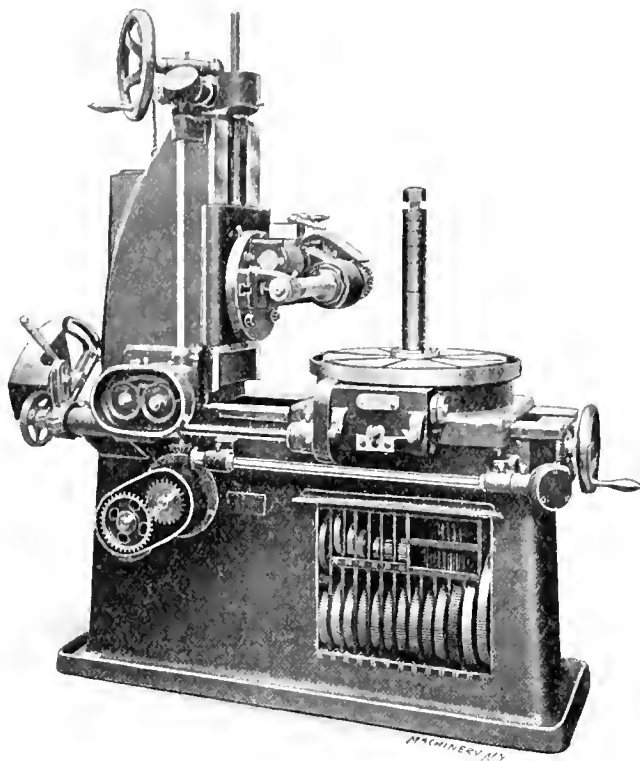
The "Rhenania" or "Burton" Spur Gear Hobbing Machine.
